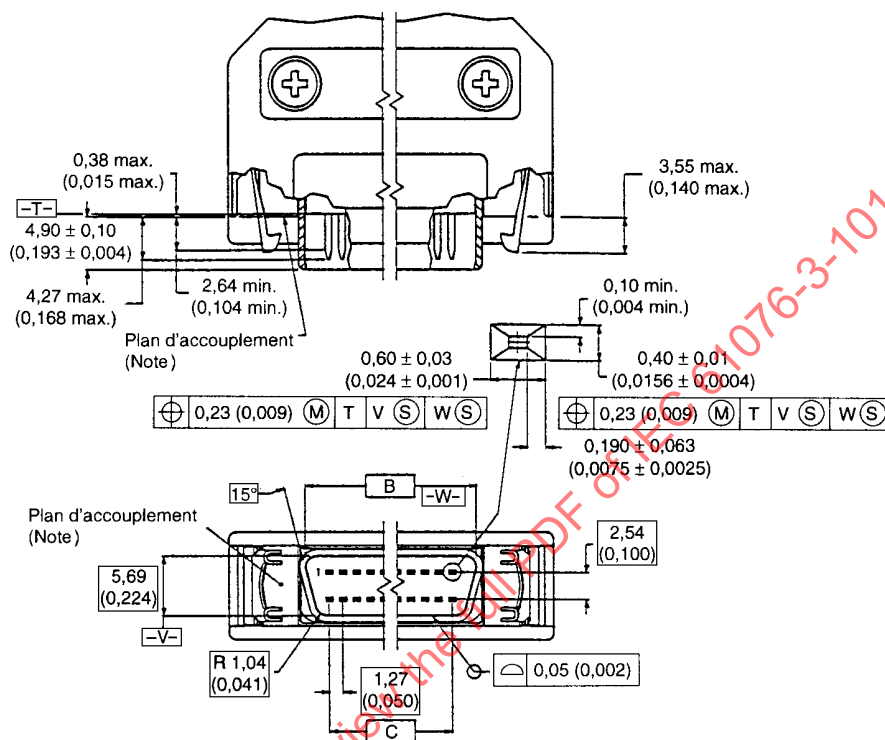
Right-angle fixed connectors with board locks – Styles F, H, J and L
